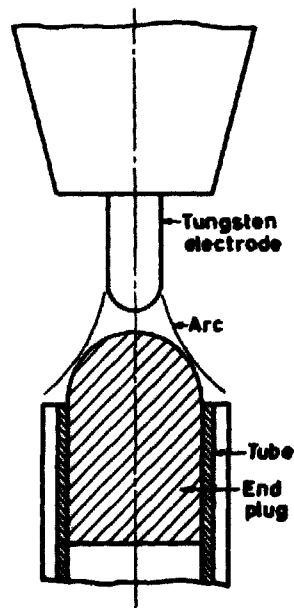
Stage during TIG-welding with cone-shaped arc of an aluminium end plug to multifinned SAP tube, the molten plug material forming a hemisphere.
